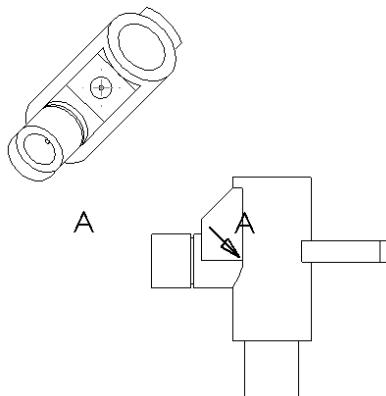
Auxiliary view created with the *Flip Direction* check box cleared
